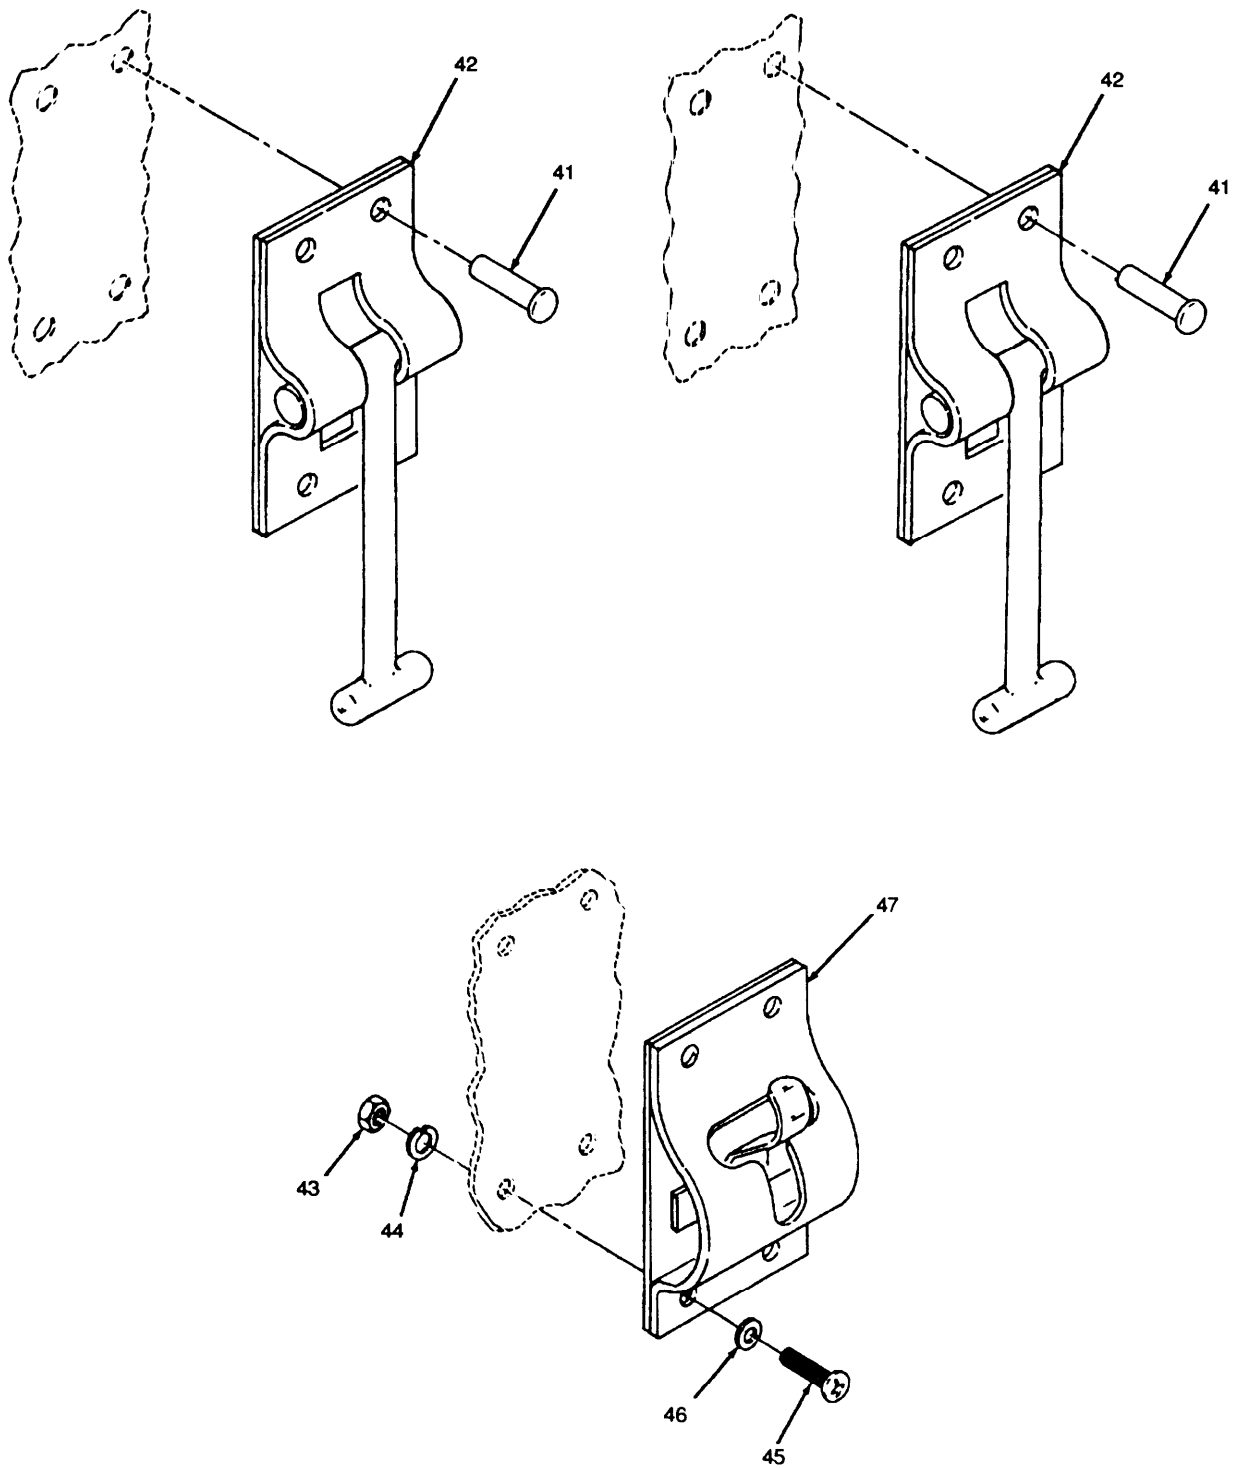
Door Handles, Locks and Latches (Sheet 3 of 3).
